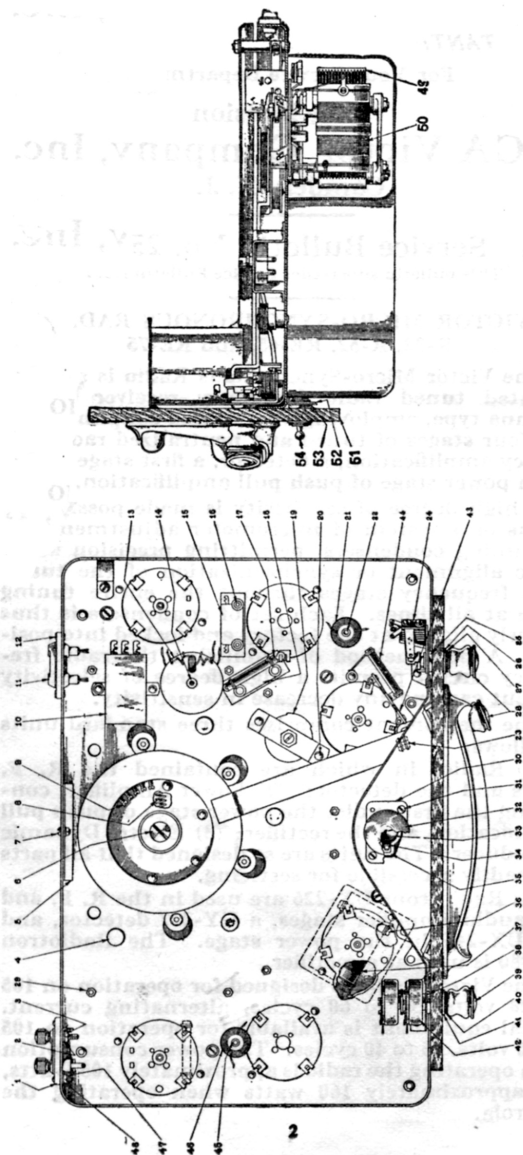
Top and Side Views of Radio with Cover Removed, Showing Parts
